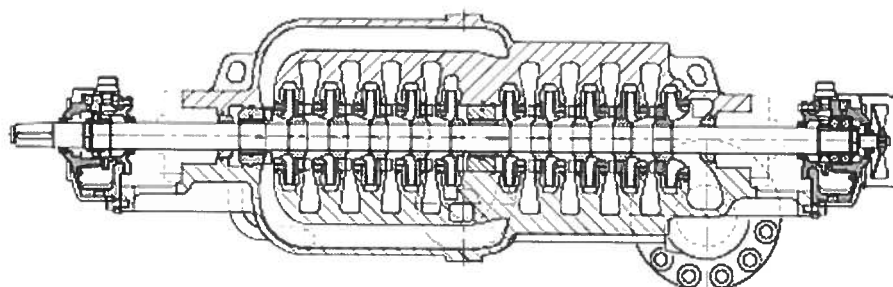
Type BB3 between-bearings axial split multistage pump
